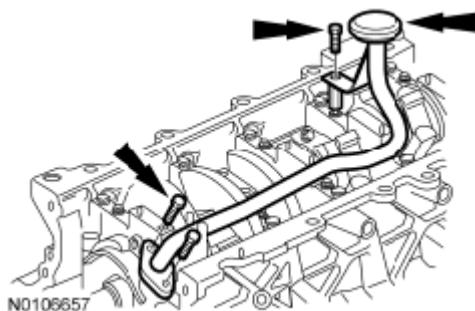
Identifying Oil Pump Screen, Pickup Tube And Tube
